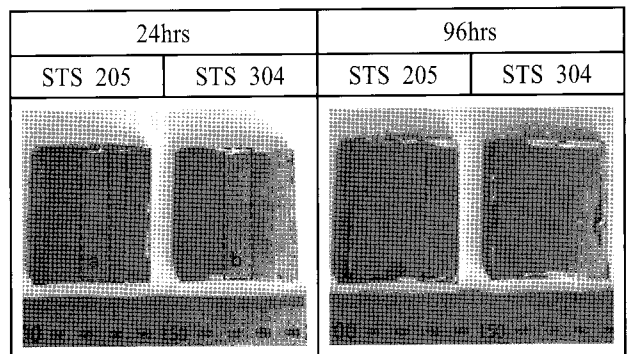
Surface morphology of STS 205 and 304 welds by salt spray test for 24hours and 96hours
